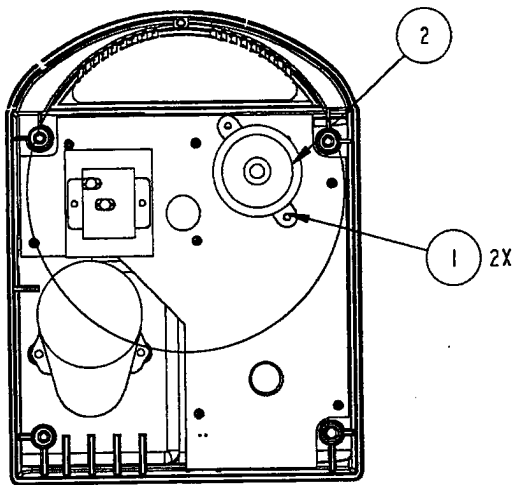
Buzzer Assembly Replacement 115 VAC Version
